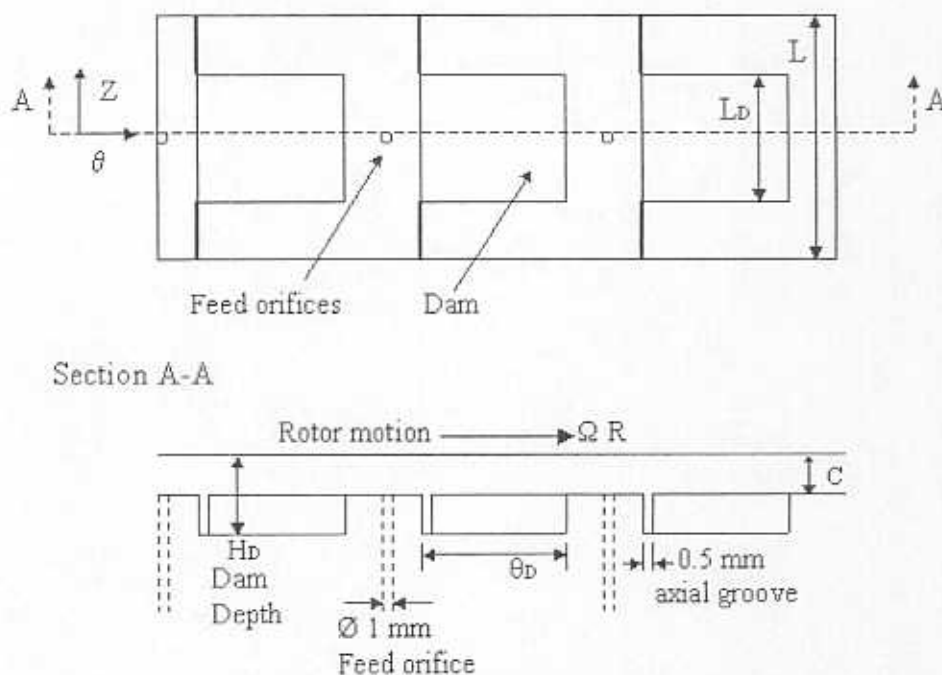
Unwrapped schematic view of the modified pressure dam bearing
